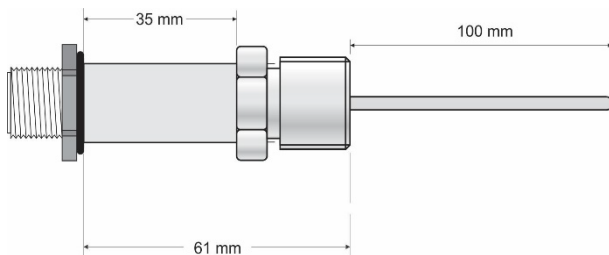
Dimensions of the TxMini-M12-MP transmitter
